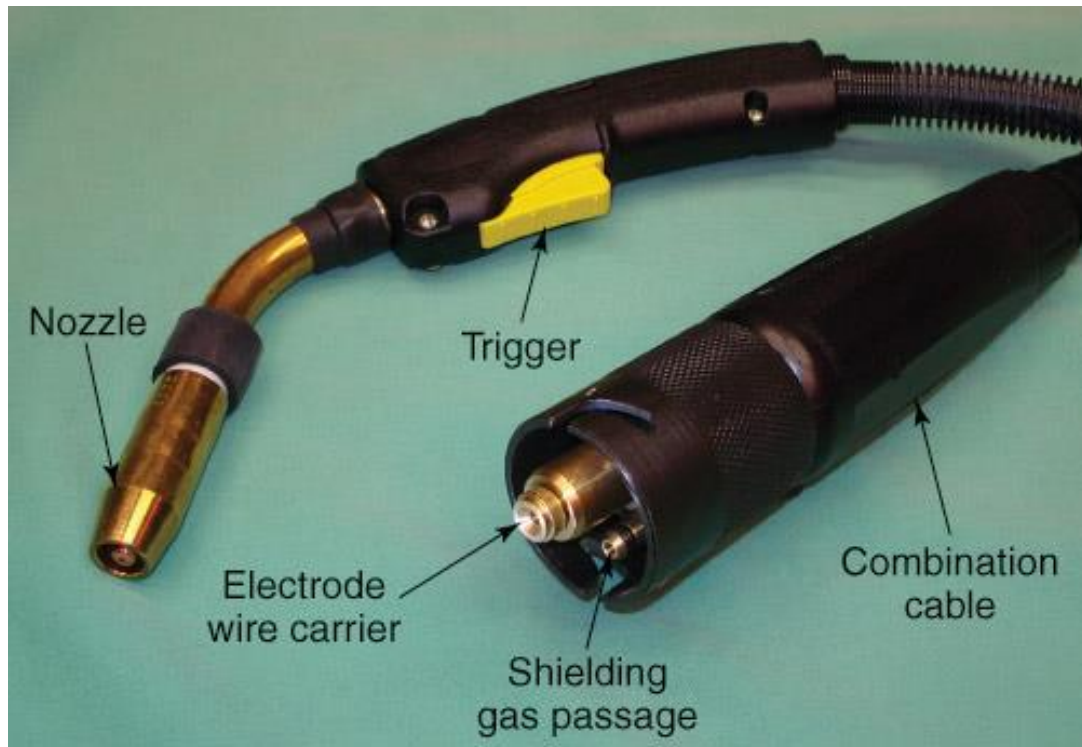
Welding gun for gas metal arc welding (GMAW).
